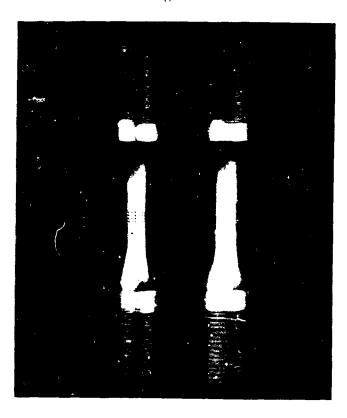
Evpical Tubular Push-Pull Specimens with ECID Holes (Left) and EDM Holes (Right)
